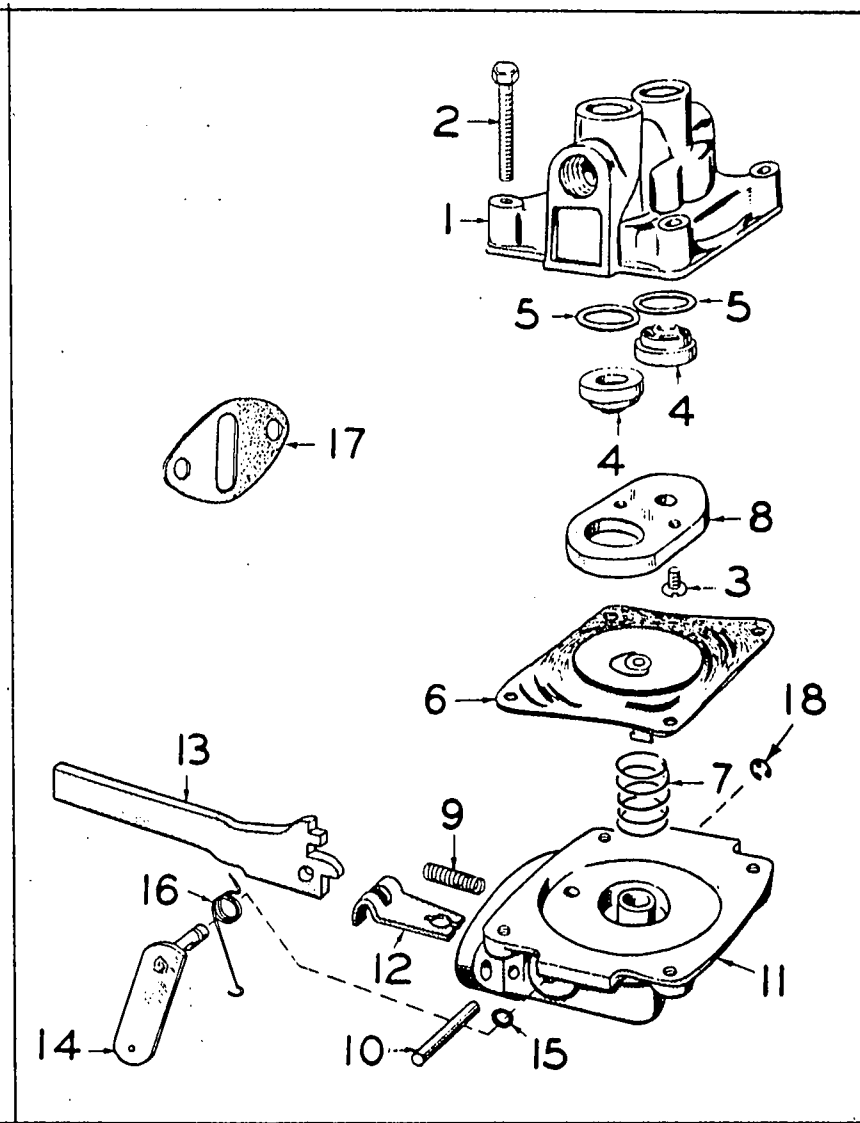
FUEL TRANSFER PUMP PARTS GROUP
